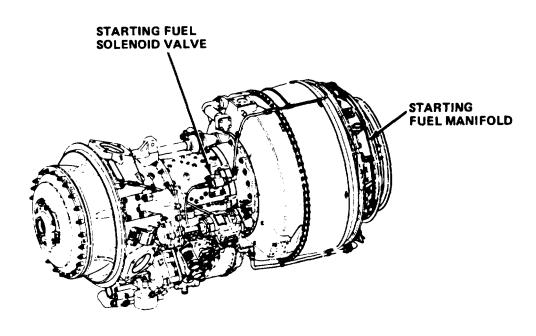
Starting Fuel System (T53-L-13B/703 Engines)
